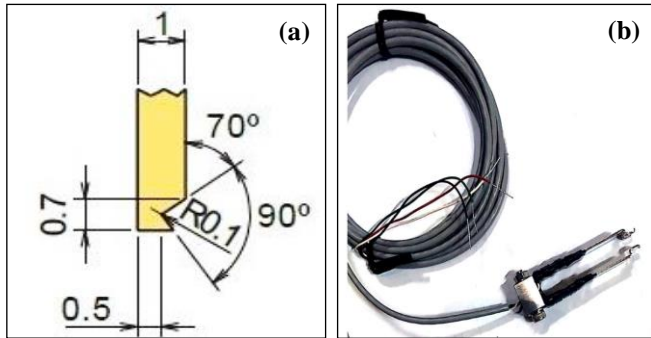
(a) Received CMOD notch details [10], (b) the UB-5A Clip type.
